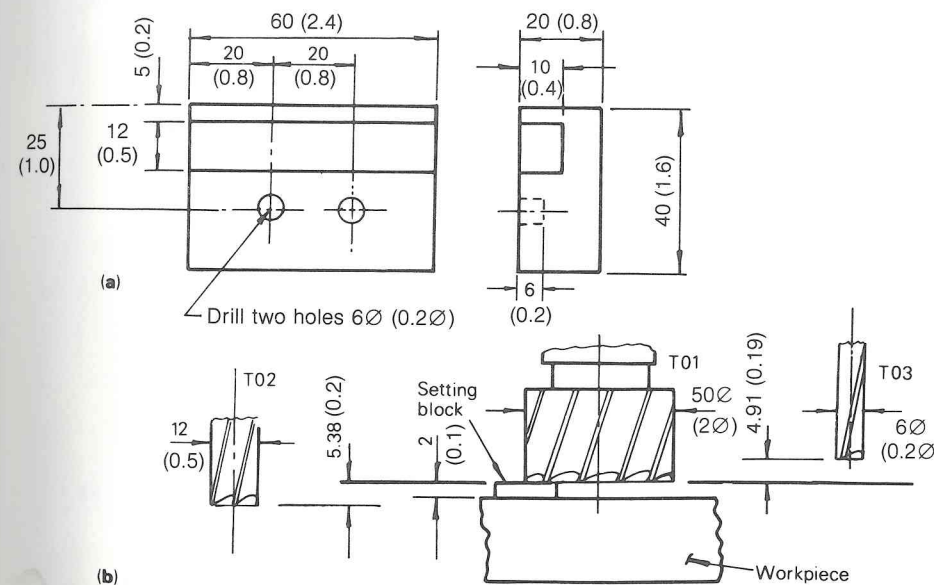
(a) Component detail and (b) tool length offsets for the milling/drilling operation. (Inch units are given in parentheses.)
